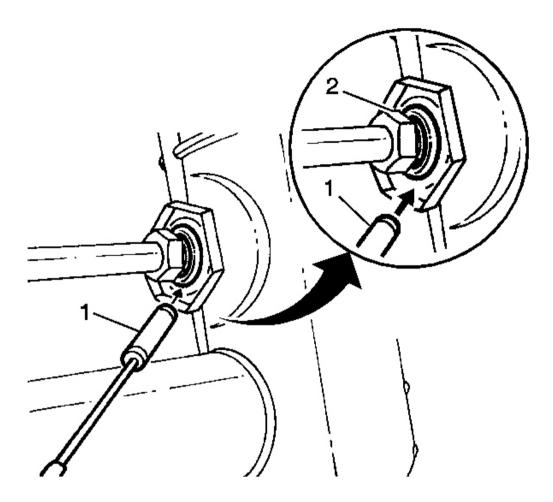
Determining Whether The Transmission Oil Cooler Is Steel Or Aluminum Courtesy of GENERAL MOTORS CORP.
